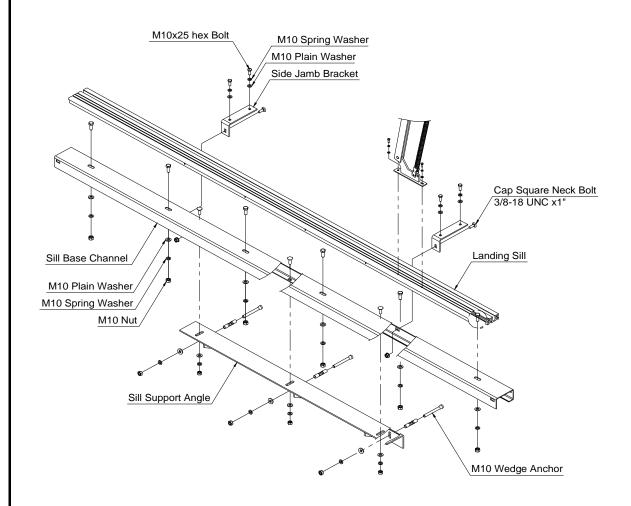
LANDING DOOR ASSEMBLY (C.P)
